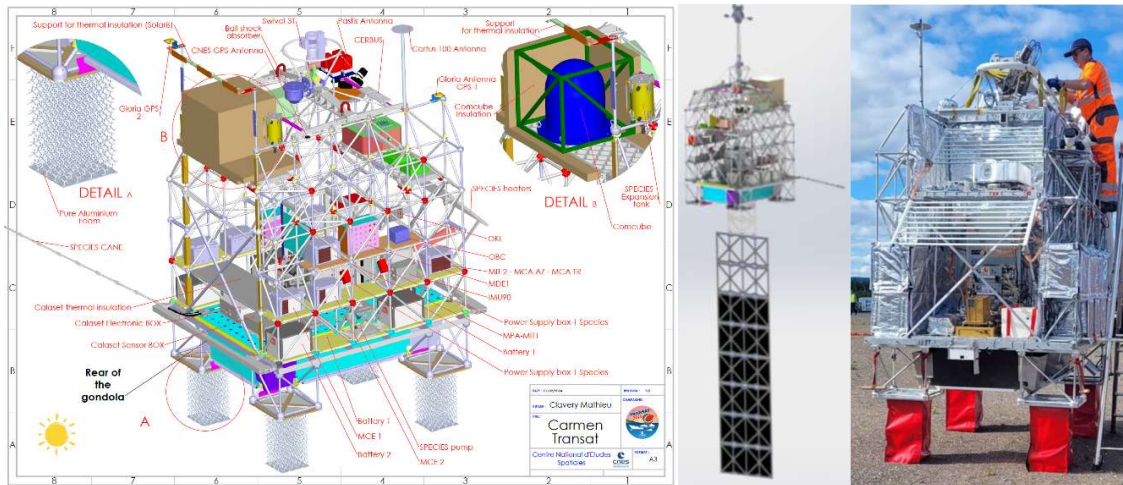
The CARMEN Gondola CAD, details, with MEDOR solar panel deployed, and on the launch pad
